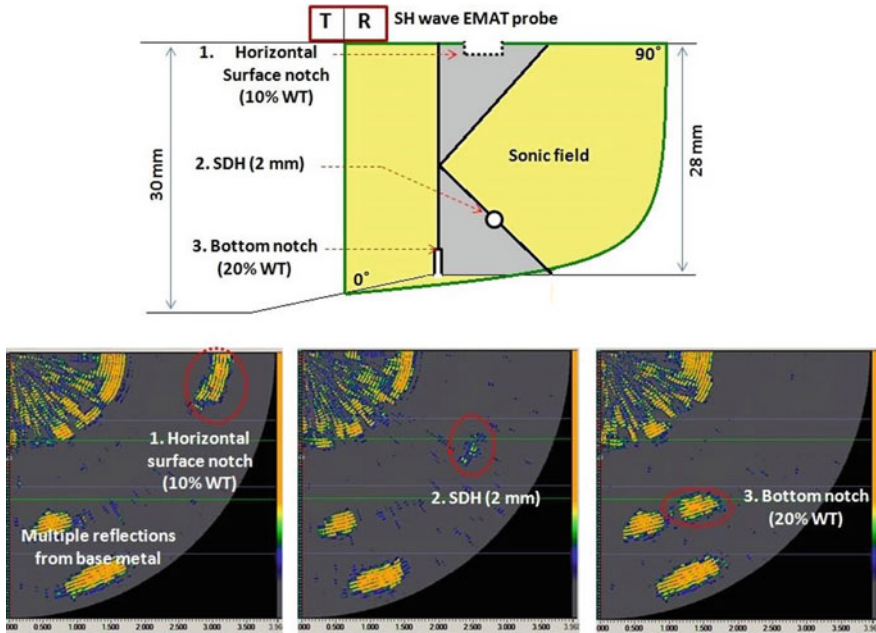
Schematic diagram of the test set-up and sector scan images obtained from the second mock-up sample with defects on both sides of the weld
